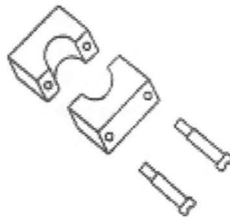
DIMENSIONAL STABILITY SPECIMEN MOLD
